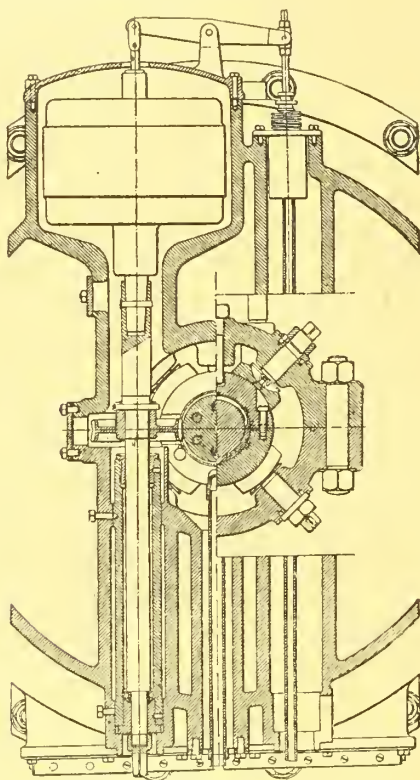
SECTION OF GOVERNOR AND SHAFT BEARING.
